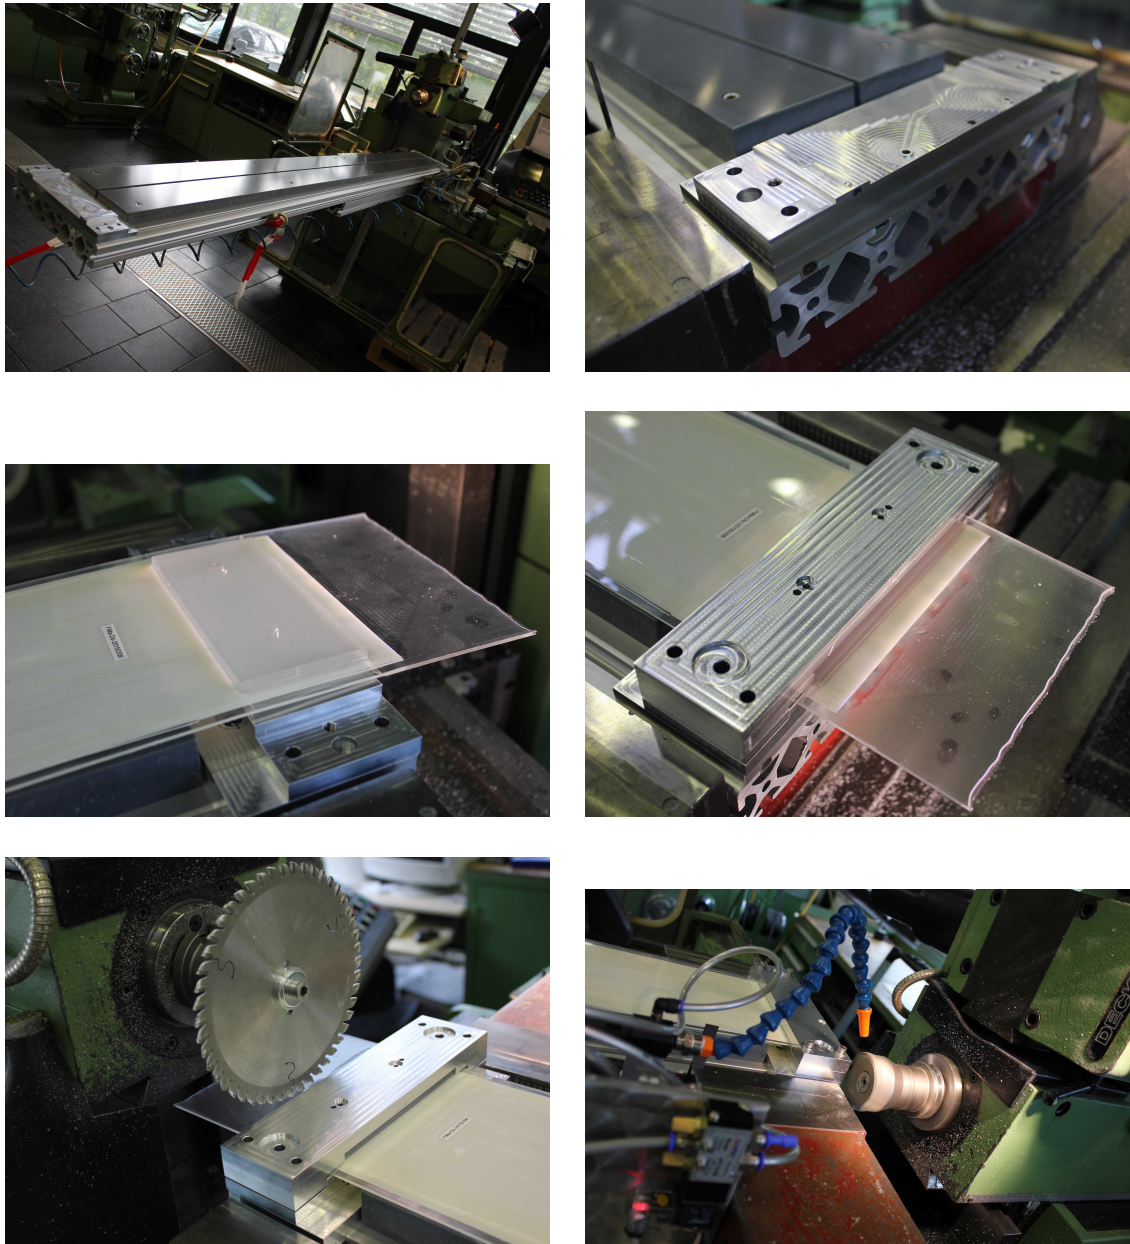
Cutting jig positioned in place at milling machine (upper left), cutting jig lower endpiece bracket half at place (upper right). Positioning (middle left) and fixation (middle right) of fibre mat on cutting jig. Pre-cut with a saw blade to cut away overlength of fibre mat (lower left). Optical cut with diamond head (lower right).
